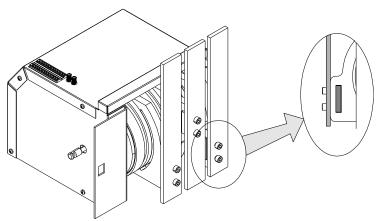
AQ1000 installation picture – bus bar mounting alternatives.
